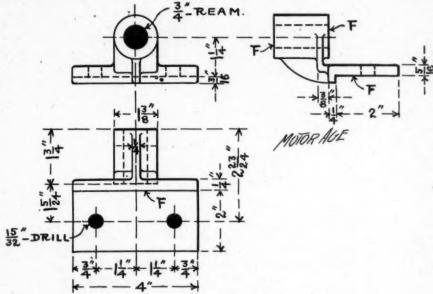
CONE CLUTCH LEVER BRACKET.
